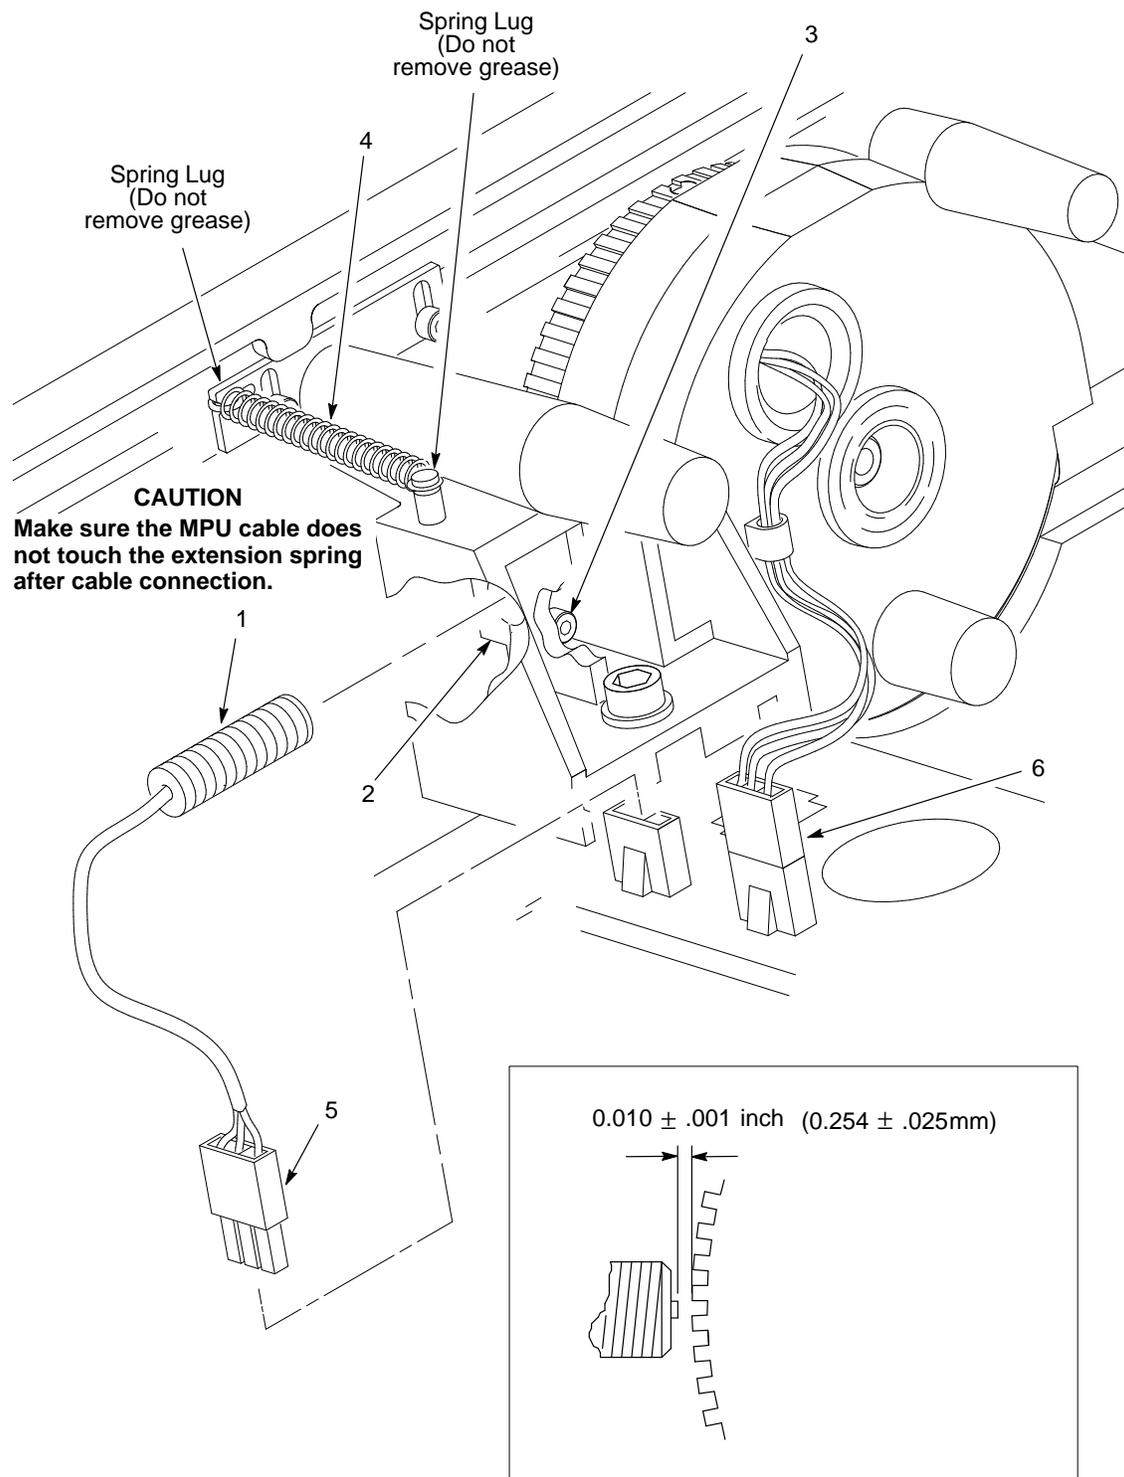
Magnetic Pickup Unit (MPU) and Extension Spring
